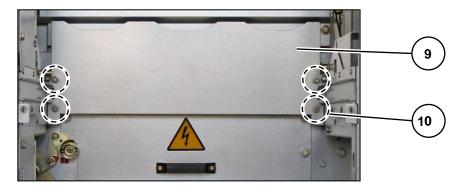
4 bolted joints on protection plate of switching-device compartment
